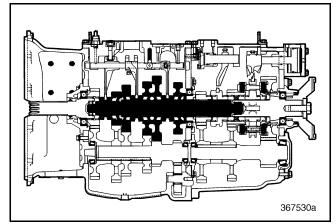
Front Mainshaft Component Locator (T313L/T318L Shown)
